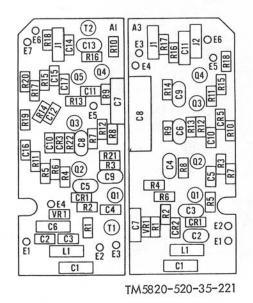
Printed circuit boards 1A6A1 and 1A6A3, parts location diagram.
